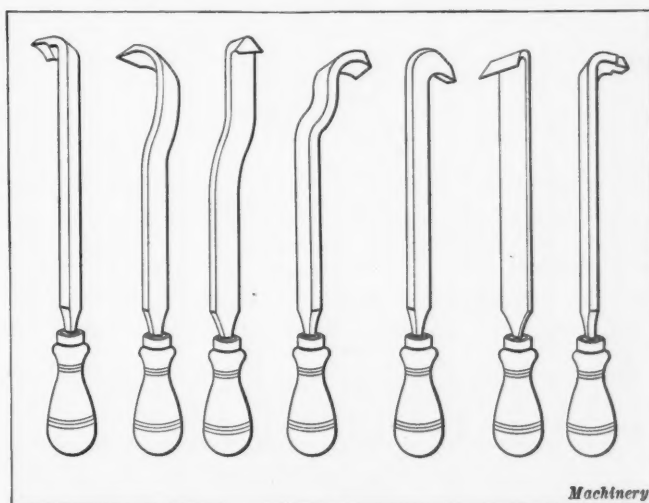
Scrapers with Straight and Large Radius Cutting Edges
